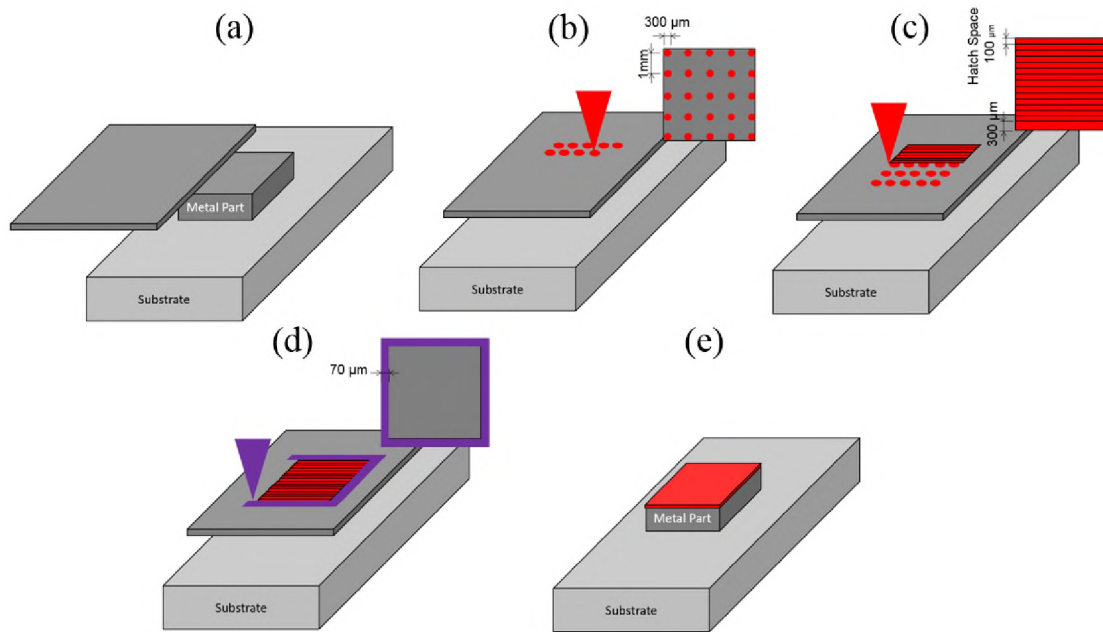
Schematic illustrations of the five steps in LFP for the processing of each layer: (a) foil feeding; (b) spot welding; (c) pattern welding; (d) contour cutting; (e) excess foil removing.
